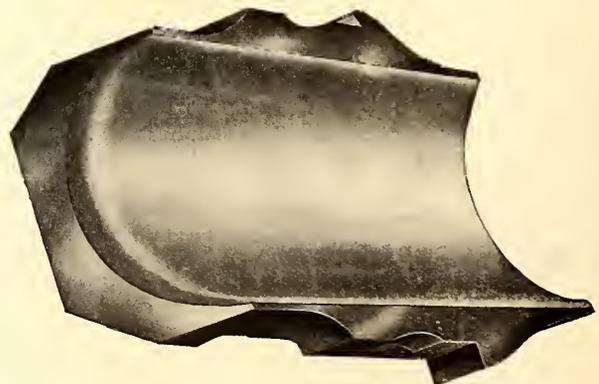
INSIDE VIEW OF CAR JOURNAL BEARING AFTER BEING BABBITTED AND READY FOR USE
